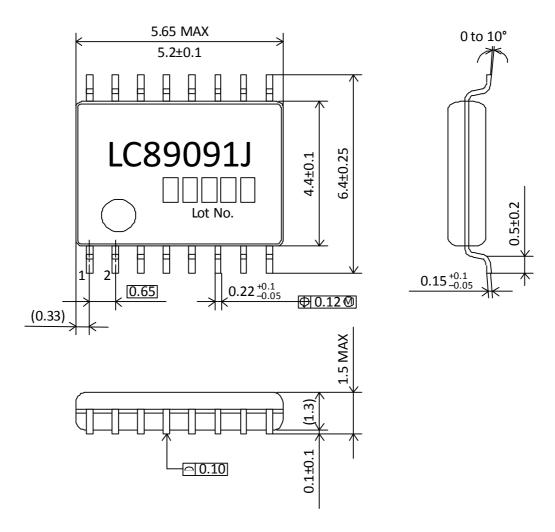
LC89091JA Package Outline Drawing (SSOP16, 225mil)
